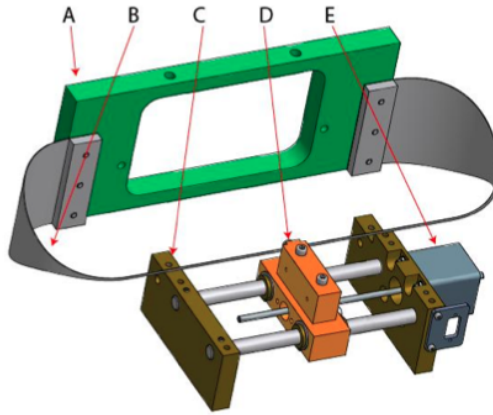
Stepper motor controlled springs for Inverted pendulum static positioning. A: Spring holder, on moving table, B: Blade springs, C: Stepper motor support and slider guide, on base structure, D: Slider, E: stepper motor with long threaded shaft.
